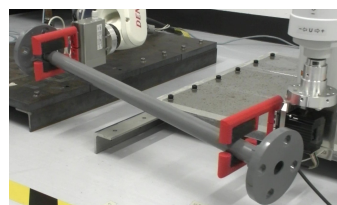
A Versatile Part Feeder with In-Hand Caging Manipulation
